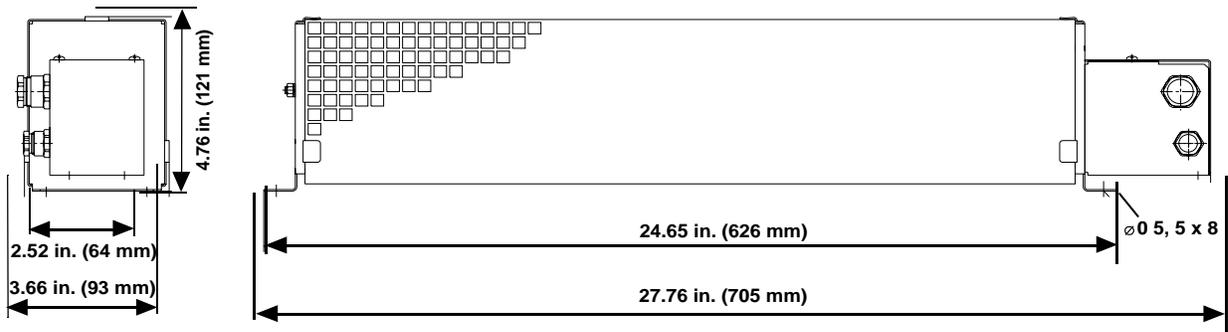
Mounting Dimensions for 460V External Shunt (P/N M.1302.7060)
